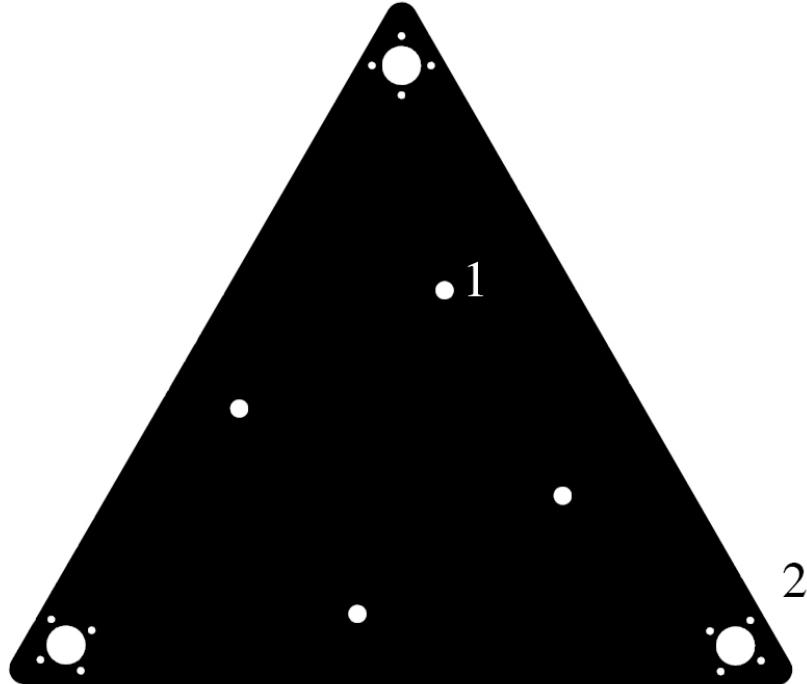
Top view sketch of the robot platform with bolt holes for the robot (1) and the flange assembly (2)
